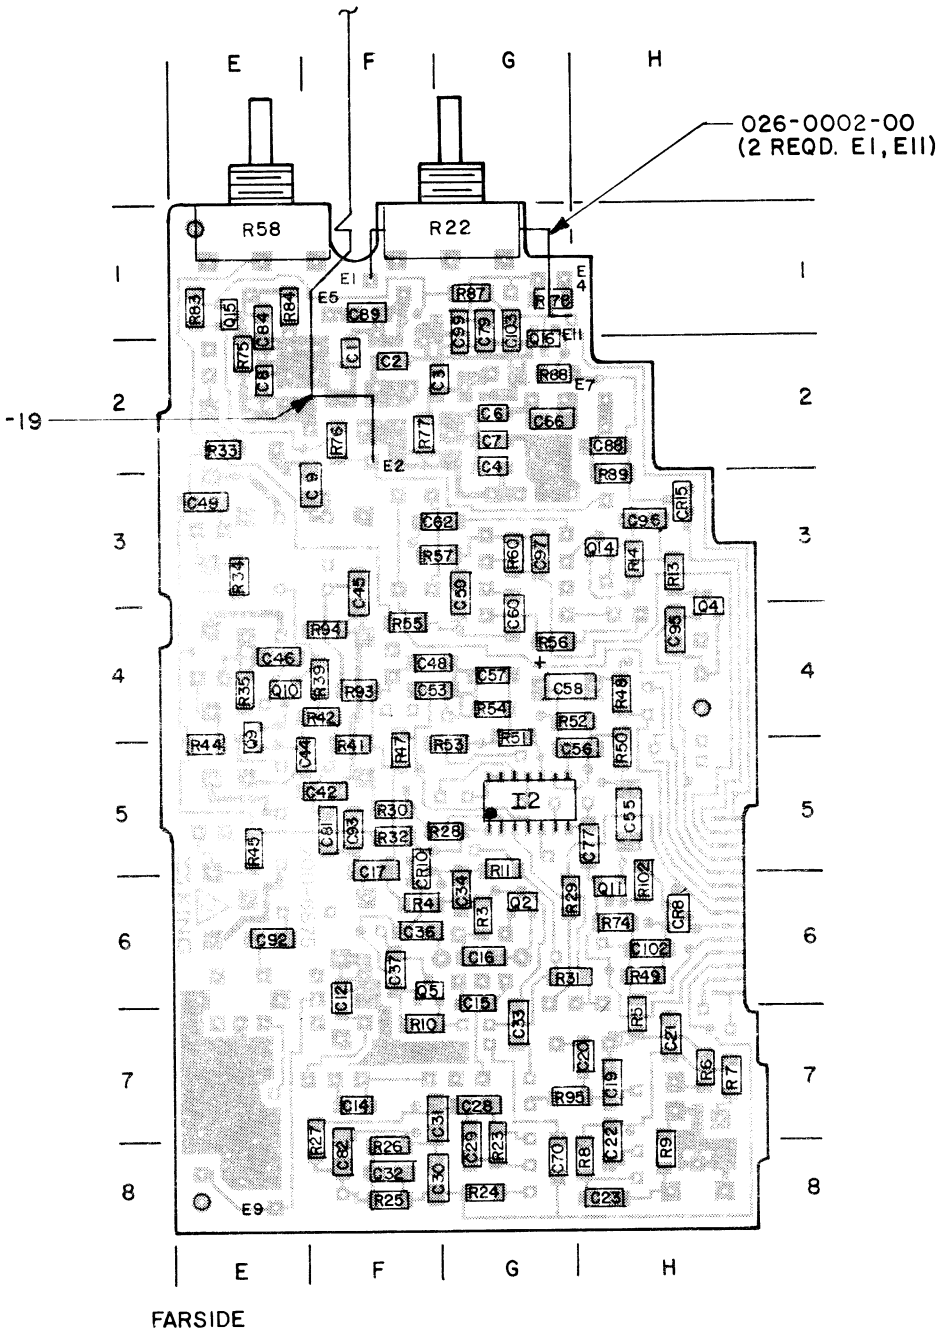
RECEIVER BOARD ASSEMBLY
